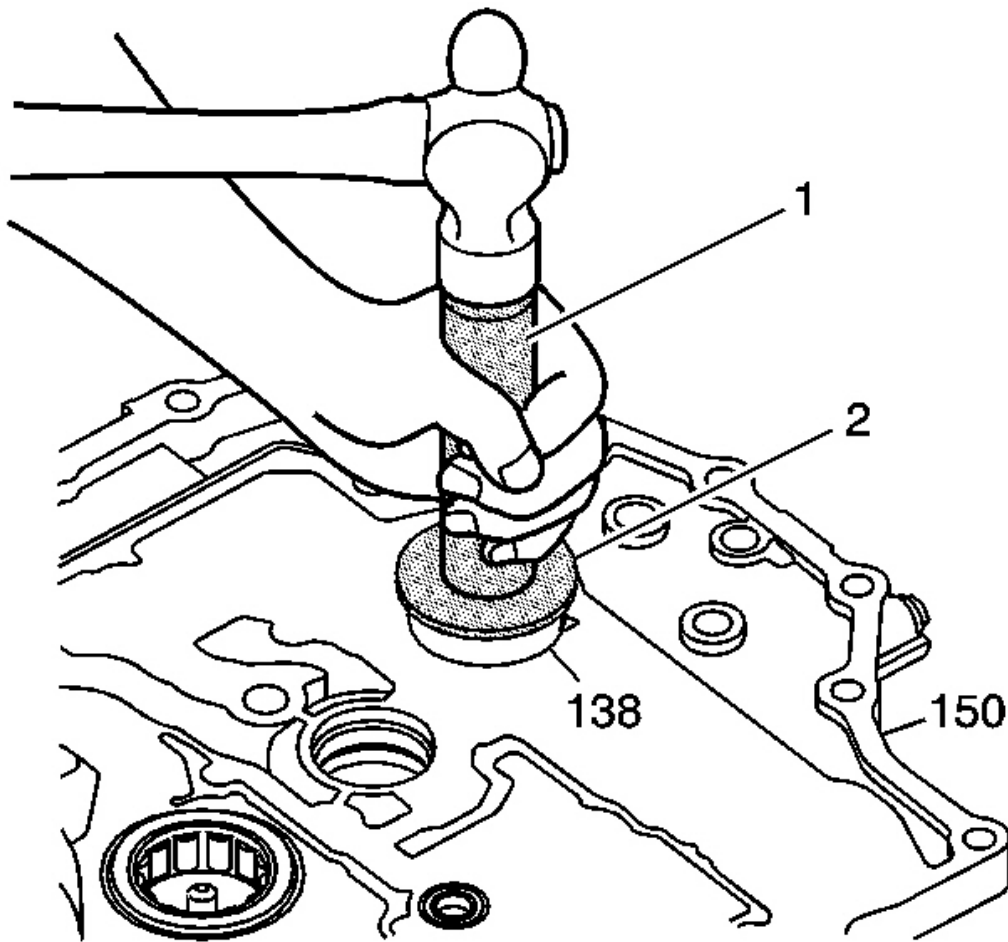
Installing The 3rd Clutch Shaft Front Bearing Using DT 46412 & EN 46342
